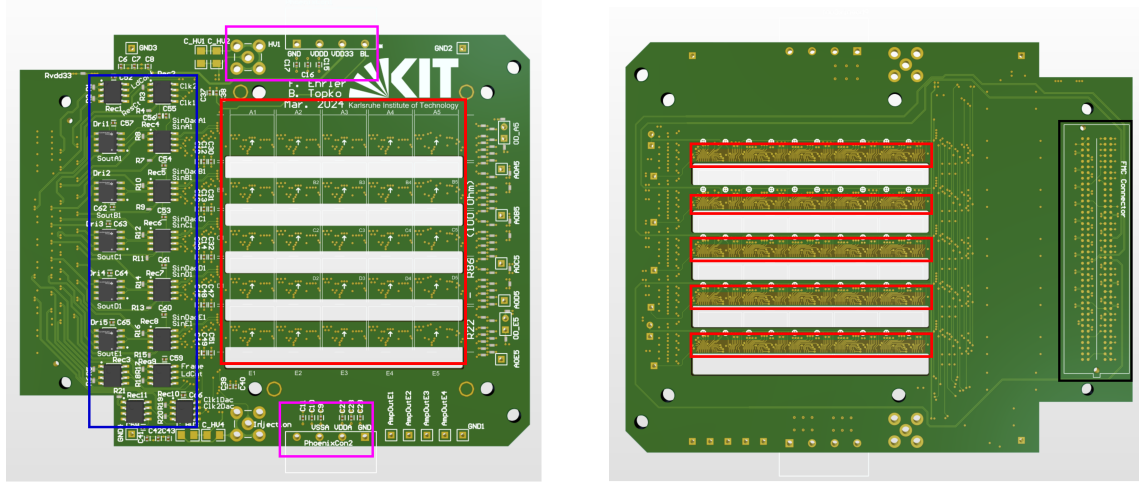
Top (left) and bottom (right) 3D render views of the HitPix2 5×5 matrix wire-bonding PCB. The red, magenta, and blue solid boxes in the top view outline the sensor mounting area, power connectors mounting areas, and signal converter ICs, respectively. The black and red solid boxes in the bottom view outline the location of the LPC-FMC connector and wire-bonding pads, respectively. The PCB was designed by the author and F. Ehrler.
